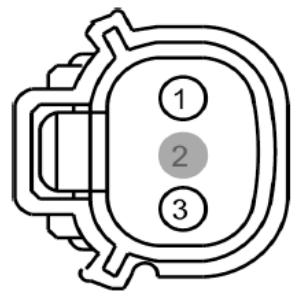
Coil On Plug 4 Connector End View (C1614)
